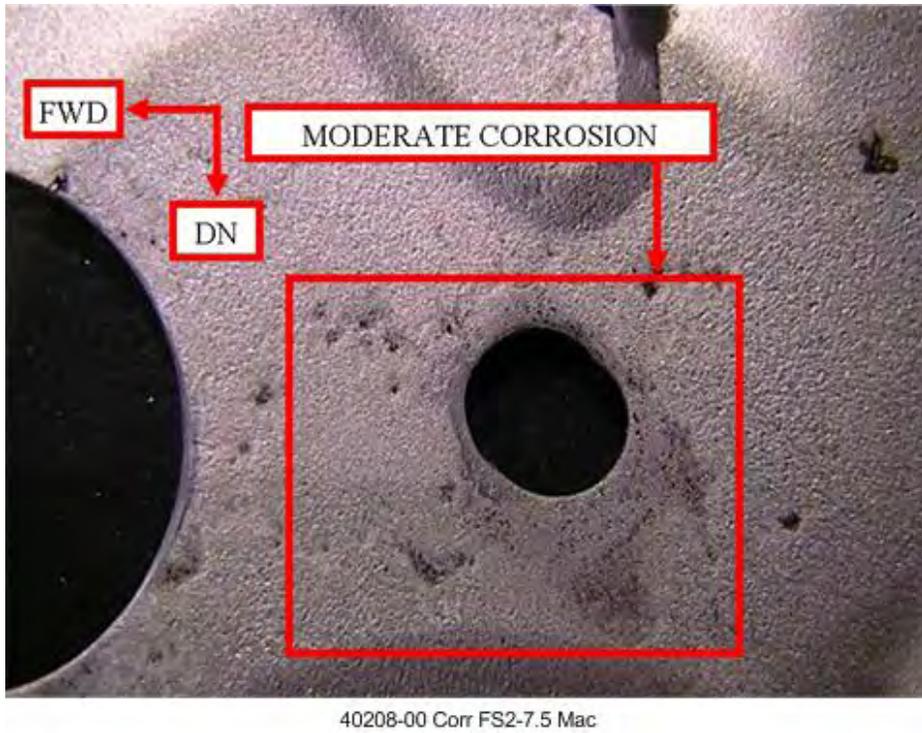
Macroscopic View of Moderate Corrosion on the Baggage Compartment Door Lock Bracket
